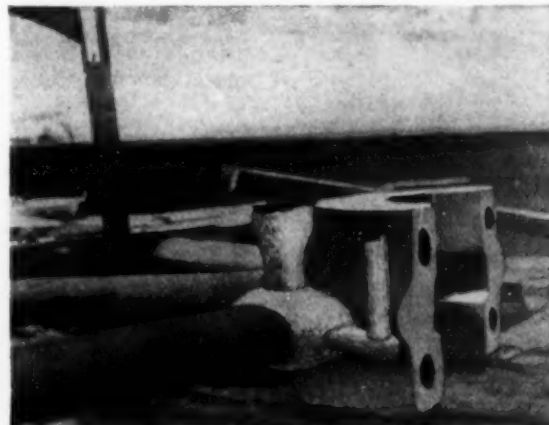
FINISHED WELD OF SPOKE NEAR HUB.
